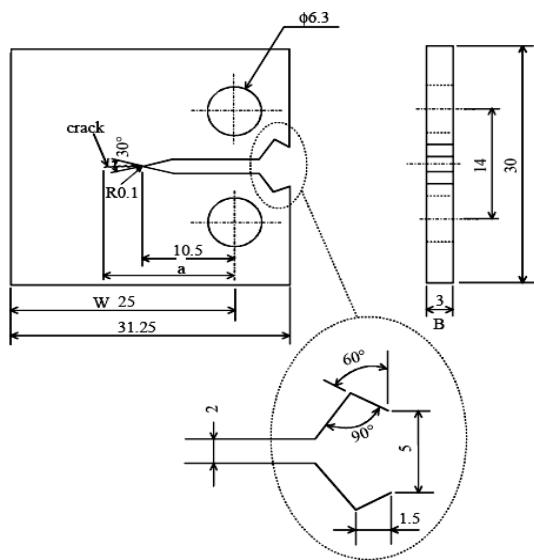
Shape of fracture toughness specimen (1/2 CT)
